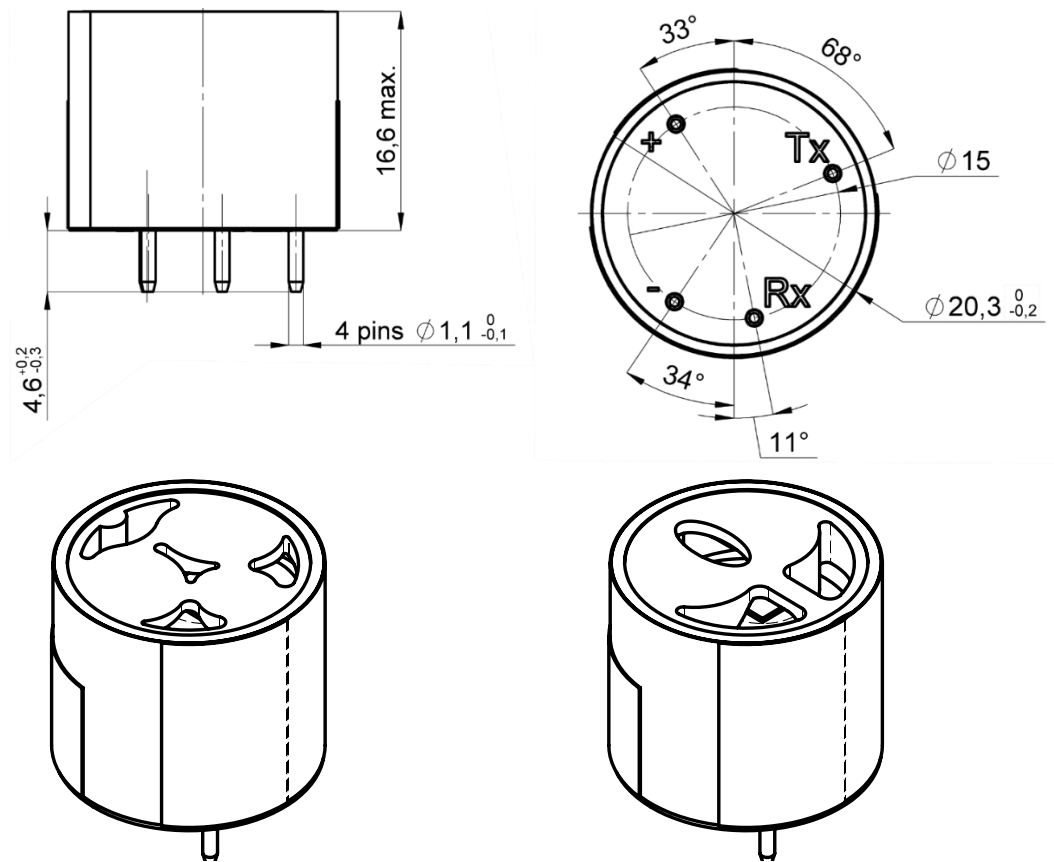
MIPEX-02-B-C-1.1 A (housing type "1") overall dimensions in millimeters
